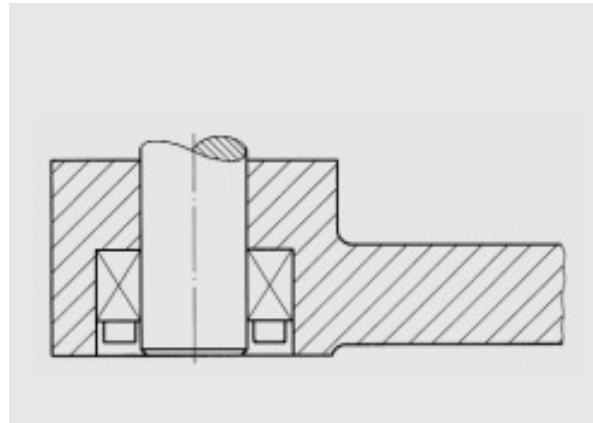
· Lever mounted using one Locking Assembly RfN 7012. Frictional-connection Locking Assembly permits stepless movement of the lever to any degree of accuracy required.
